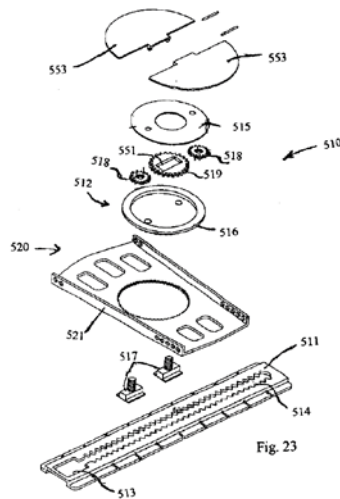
Longitudinally adjustable snowboard binding mounting system exploded view
